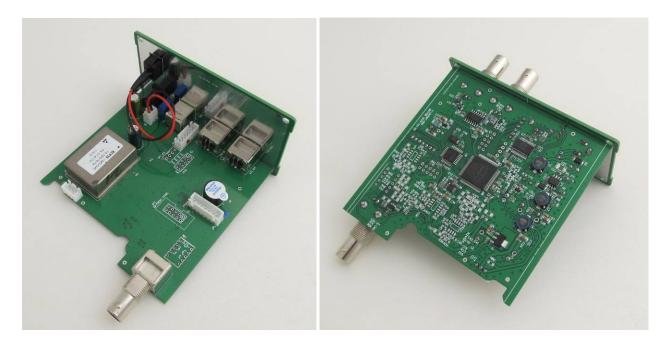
~ Main printed circuit board top (left) and bottom (right) views, both with the PCB fastened to the rear panel (it is removeable). All components on the main PCB except the oven-controlled crystal oscillator, piezoelectric beeper and ribbon connectors are surface mounted devices on the bottom. The oven-controlled crystal oscillator is the rectangular metal box
